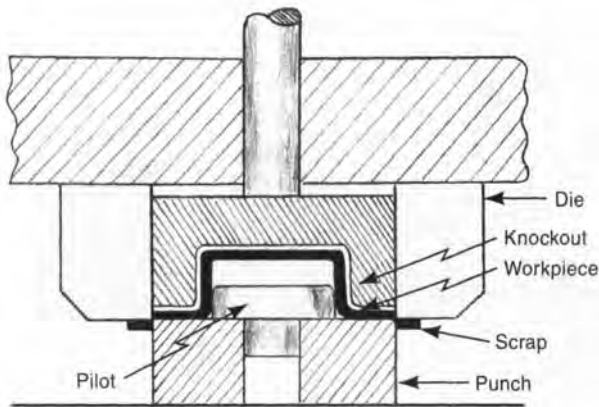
C6 Trimming a drawn cup. This method is intended to leave a flange at the top of the cup.
